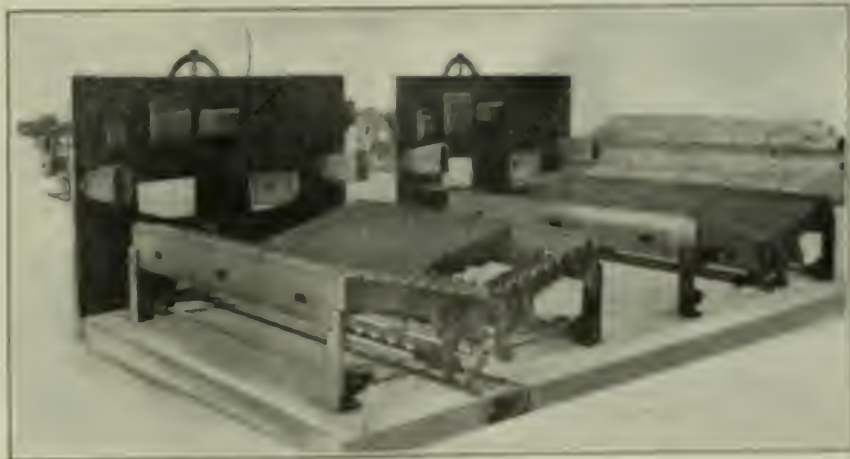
ASSEMBLY POSITION OF GRATE, WHEAT CHESTER, CO.
